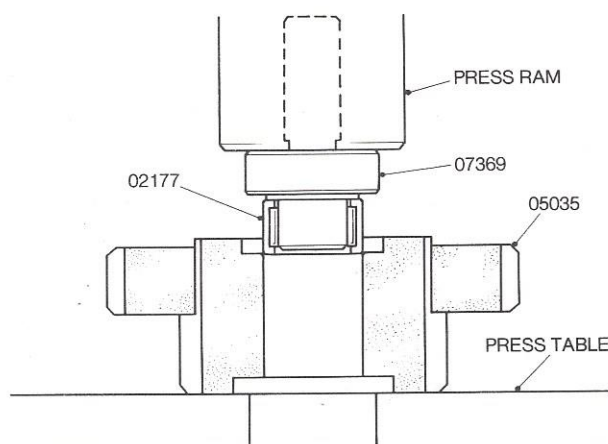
Assembly of the Layshaft Gear Needle Roller Bearings
